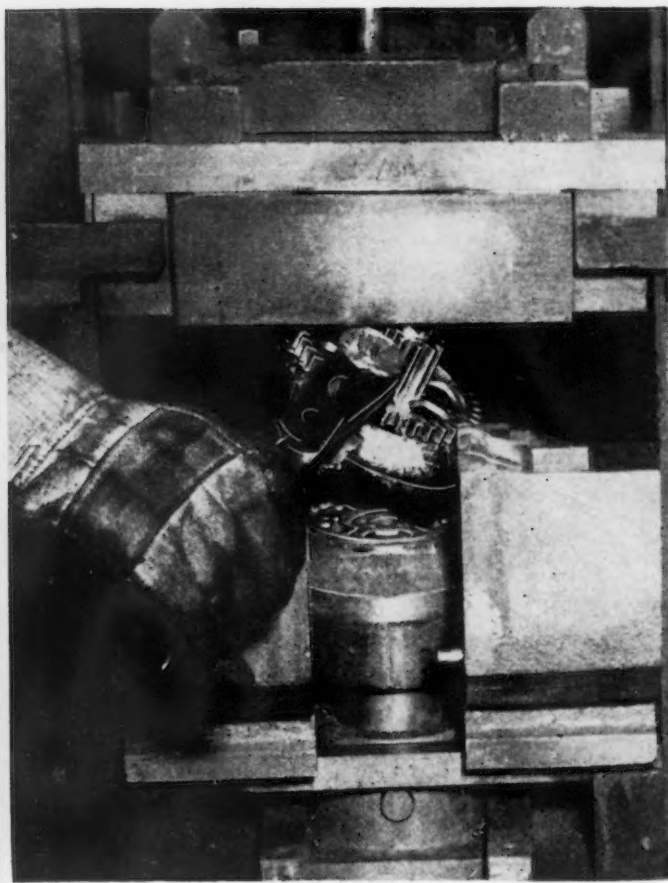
Close-up of die, showing operator removing the casting. The central vertical die slide, the end of which has formed the lower face of the casting, is also visible.
